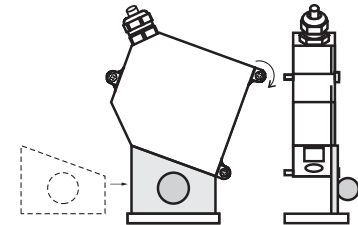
Dimensional Drawings range optoNCDT1700-20DR (not to scale)
